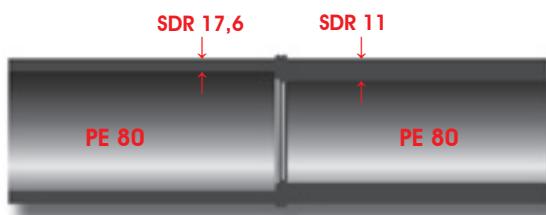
Butt welding - Verbindung Stumpfschweißen - Стыковое соединение
